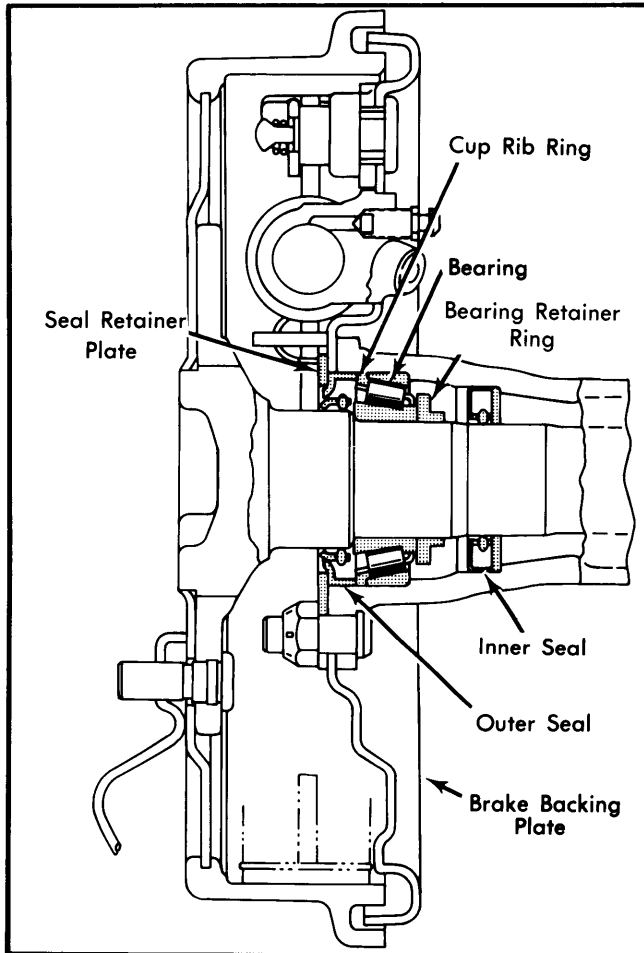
Sectional View of Flanged Shaft End With Non-Adjustable Bearing
